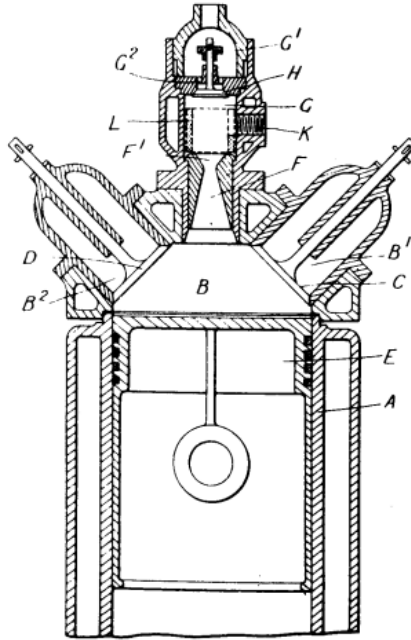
Internal combustion engine developed by Caleb E. Summers, featuring a mechanically actuated auxiliary intake valve [42].
